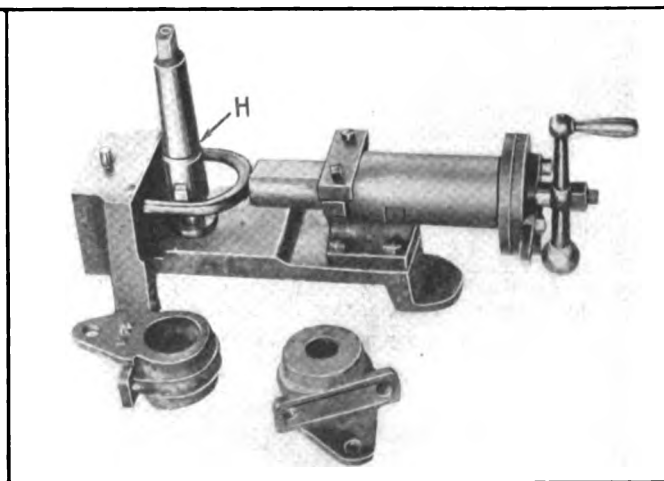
FIXTURE WITH PARTS IN WORKING POSITION
